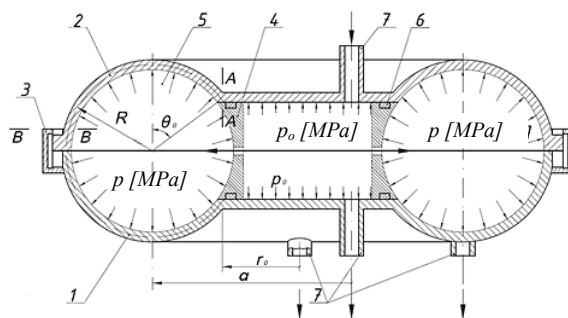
Design of the baromembrane apparatus: 1 — lower cover; 2 — upper cover; 3 — bayonet lock ring; 4 — flat-chamber module; 5 — tubular module; 6 — seal; 7 — inlet and outlet pipes
